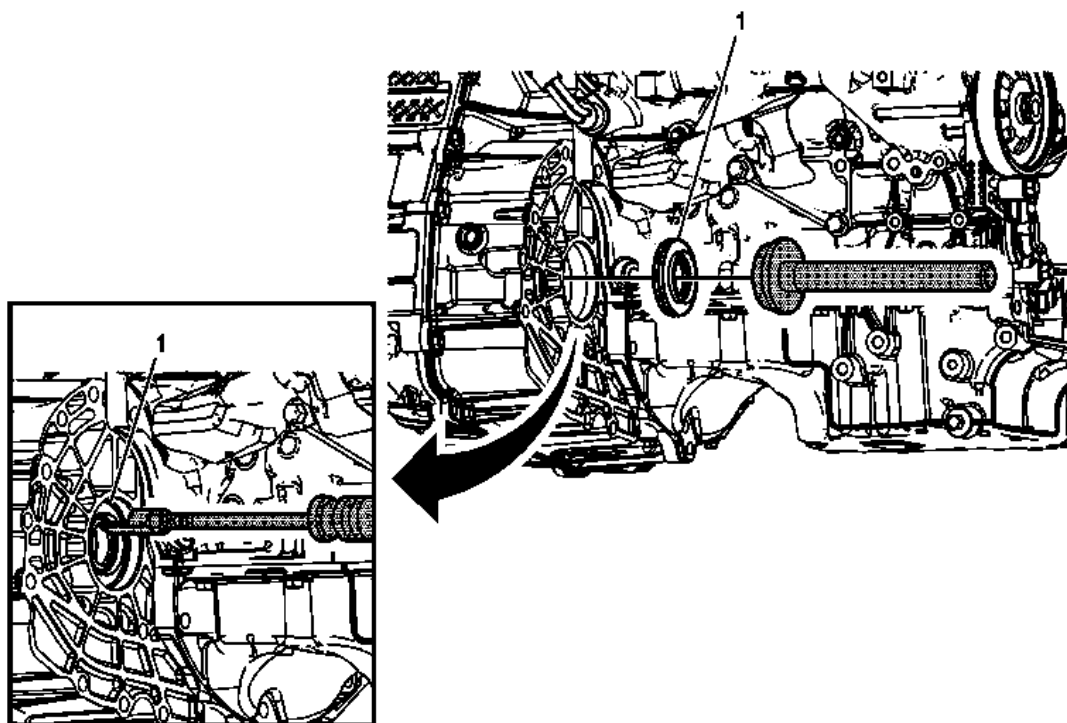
Identifying Front Wheel Drive Shaft Oil Seal - Right Side
